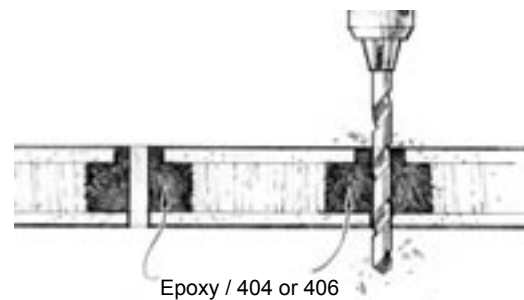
Redrill slightly oversized fastener holes through the cured epoxy
